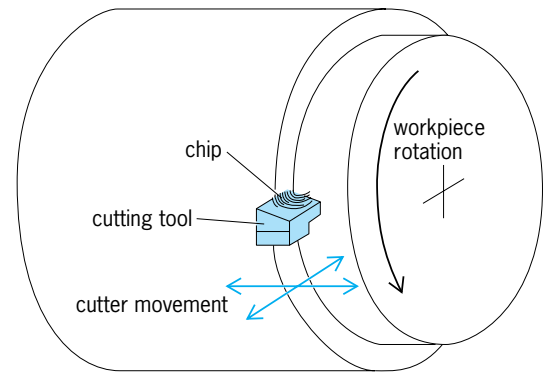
Formation of turning chips as a single-point tool contacts the exterior of the spinning workpiece.
